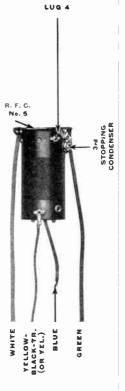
(Below) Coil Group, Showing Location of Parts and Connections of Leads.
